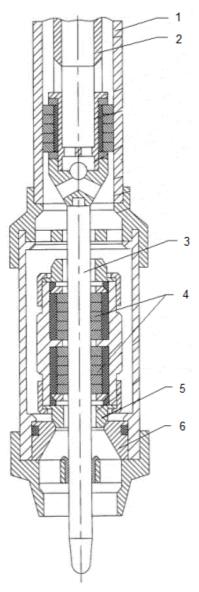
Differential piston pump: 1-cylinder, 2-piston, 3-rod, 4-mechanical seal of NSB (HCE) type, 5- standing valve, 6-standing valve collar.
